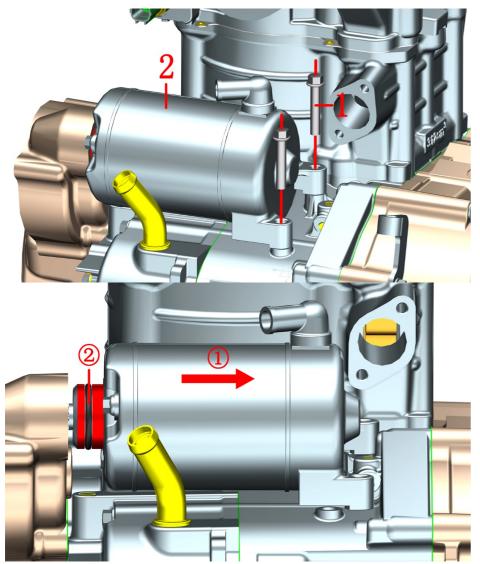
LEFT CRANKCASE COVER ASSEMBLY		Disassembling the starter motor	CHK	Ø
